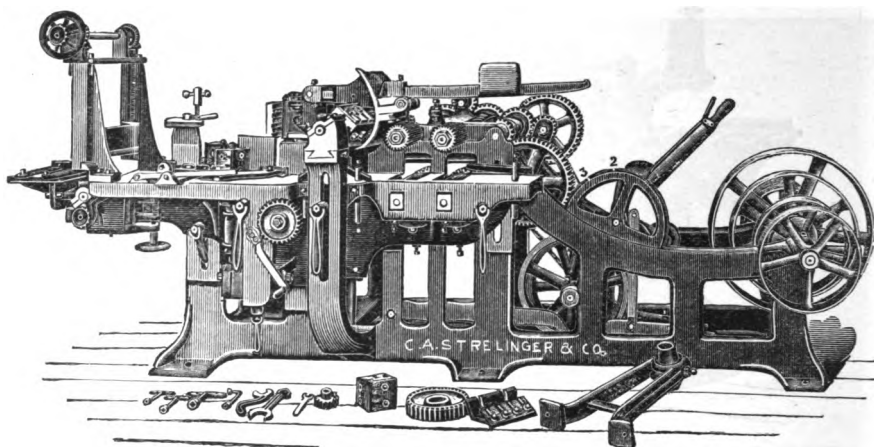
9 INCH FOUR-SIDED MOULDER.
